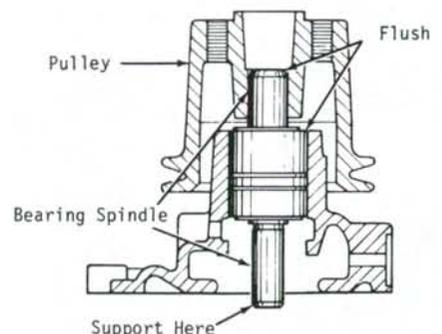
Outer end of pump shaft bearing should be flush with face of water pump body. Pulley installation shown is for all models except 1594 and 1690.
